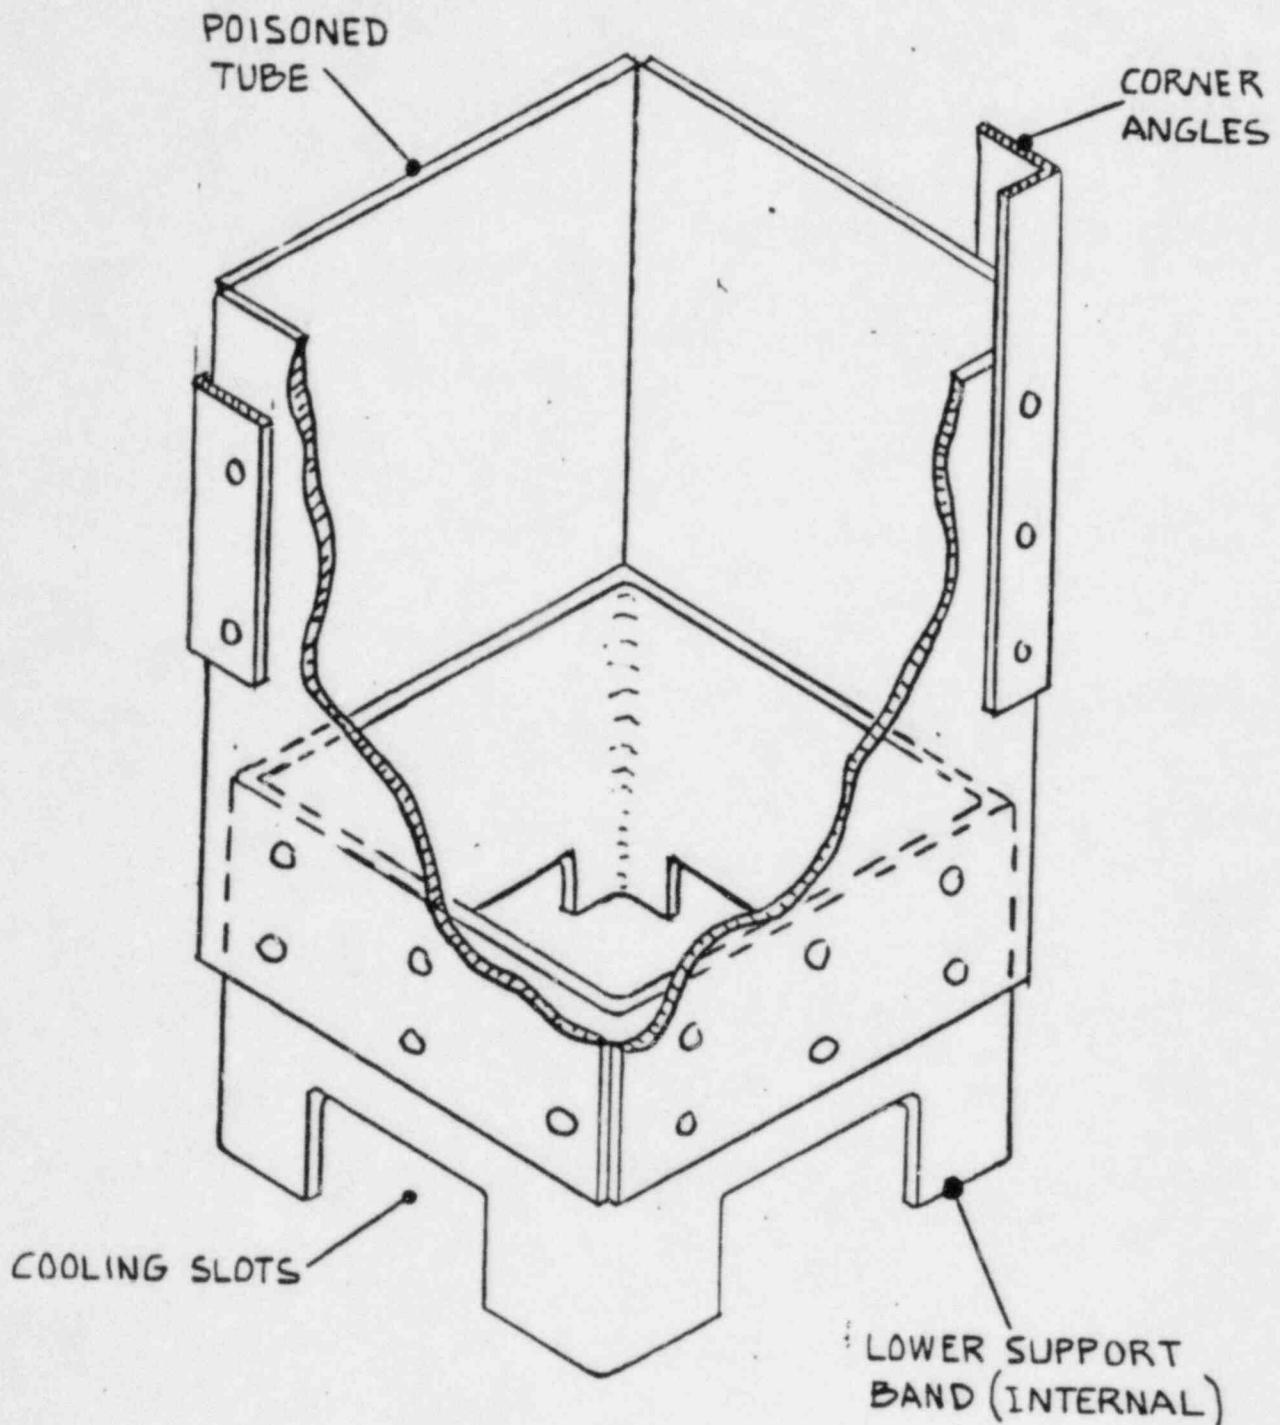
Fuel Assembly Protective Can (Upper View)
